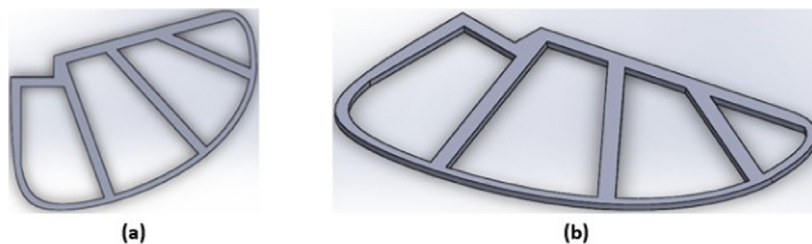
MAV wing design; (a) top view and (b) isometric view.
